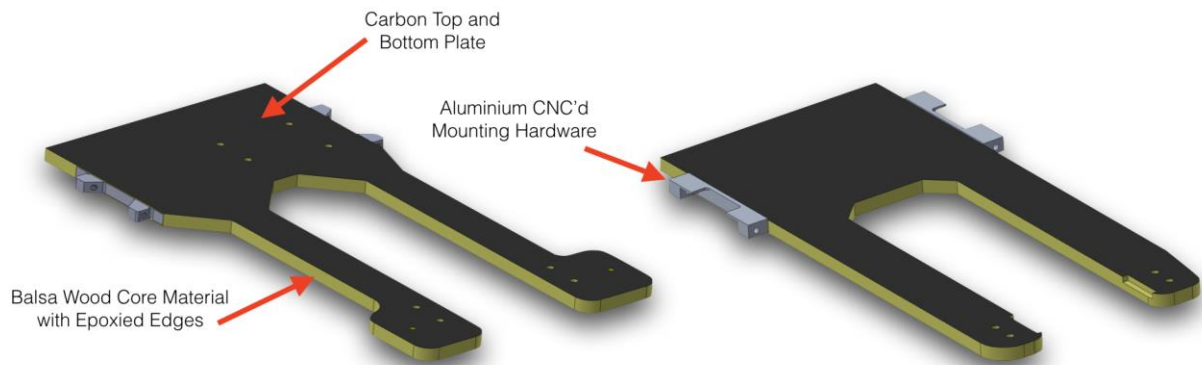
(left) Current drivetrain plate, (right) Redesigned engine plate
